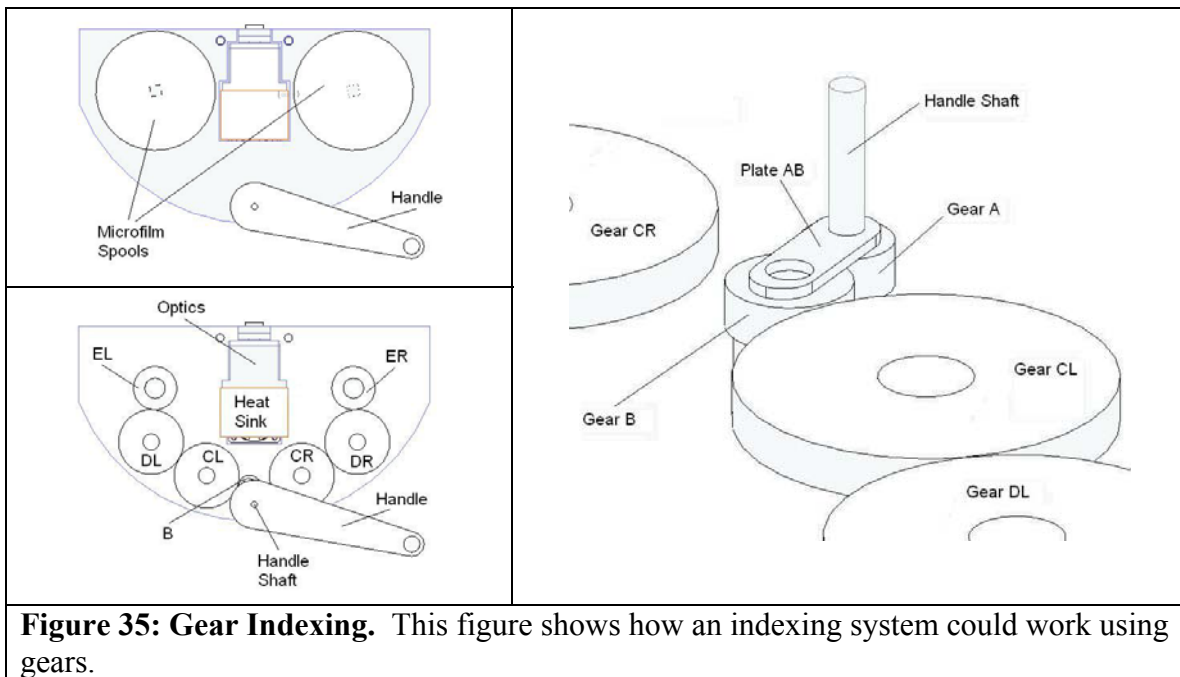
Gear Indexing. This figure shows how an indexing system could work using gears.
